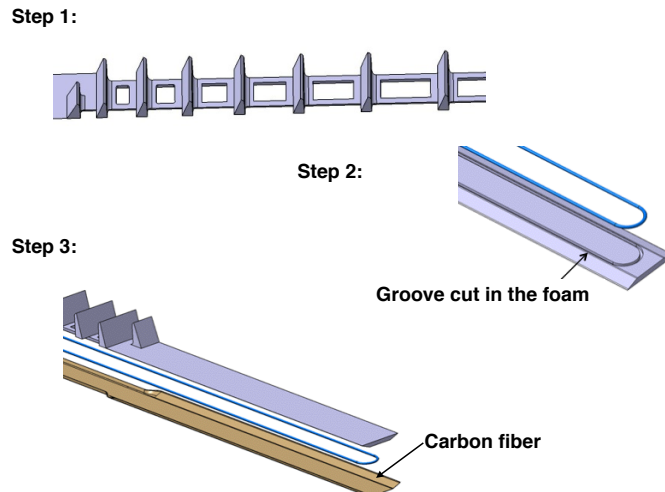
Manufacture procedure of the 1.2 m long mechanical prototype.
